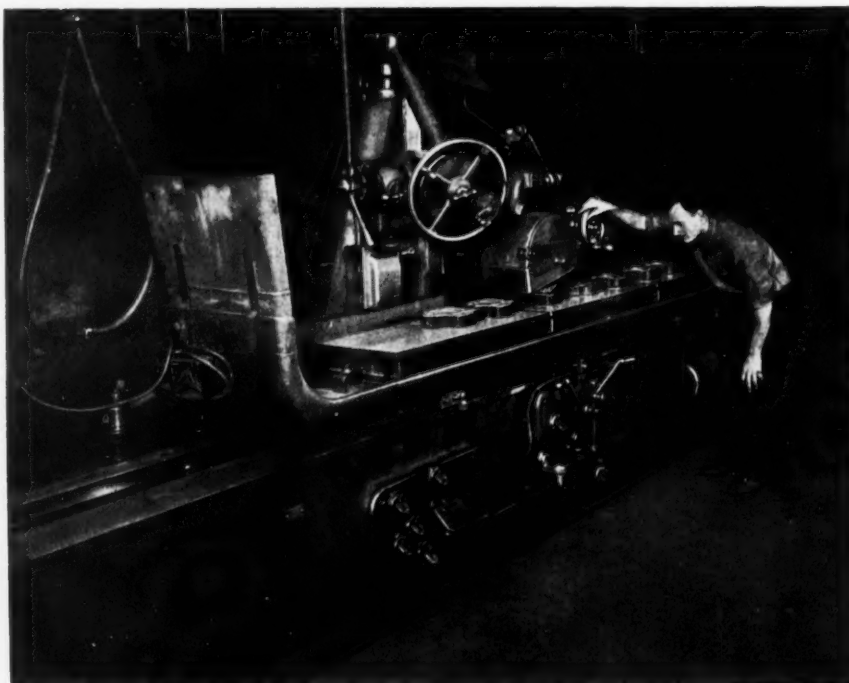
Surface Grinding Finishes Work Fast and Accurately in a Machine Tool Plant. The Illustration Shows a Quantity-production Operation on Pump Bodies
